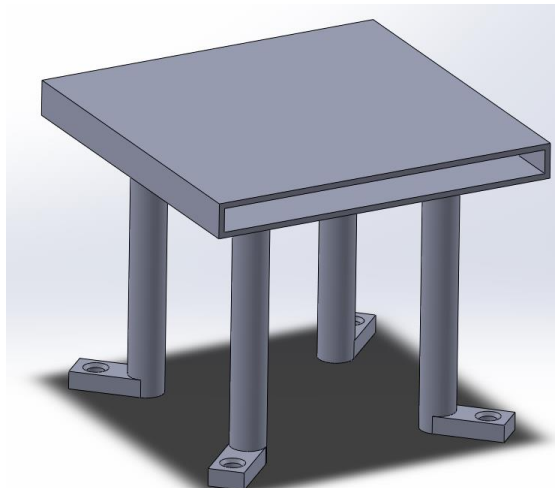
DESIGN IN *SOLIDWORKS* FOR THE 3D PRINTED PIECE
